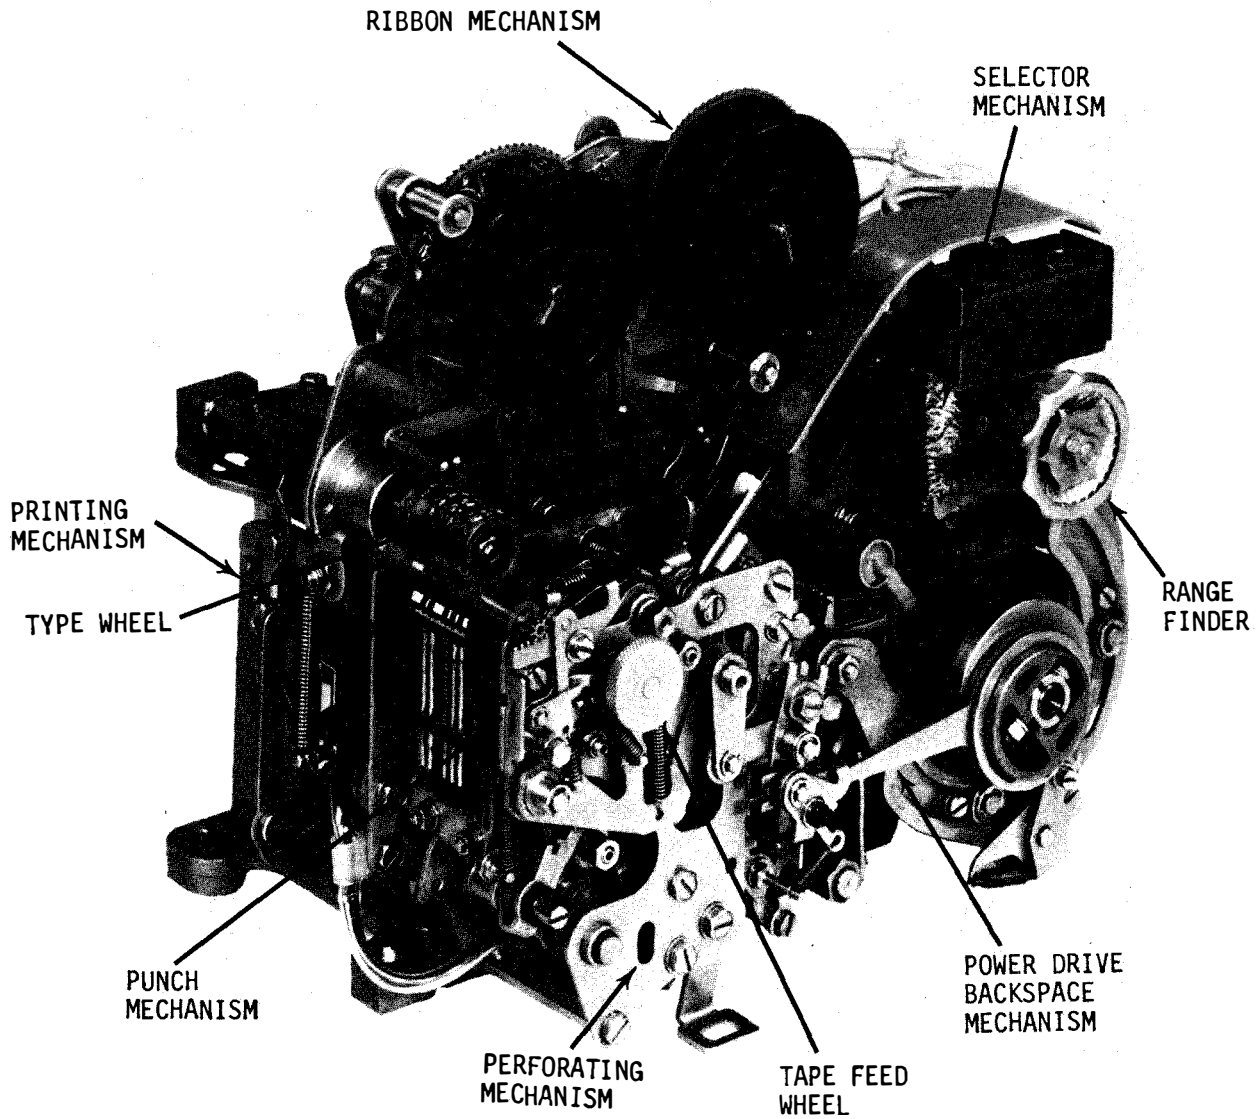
Typing Reperforator Unit Model 28 (Chadless Tape), Left Front View
